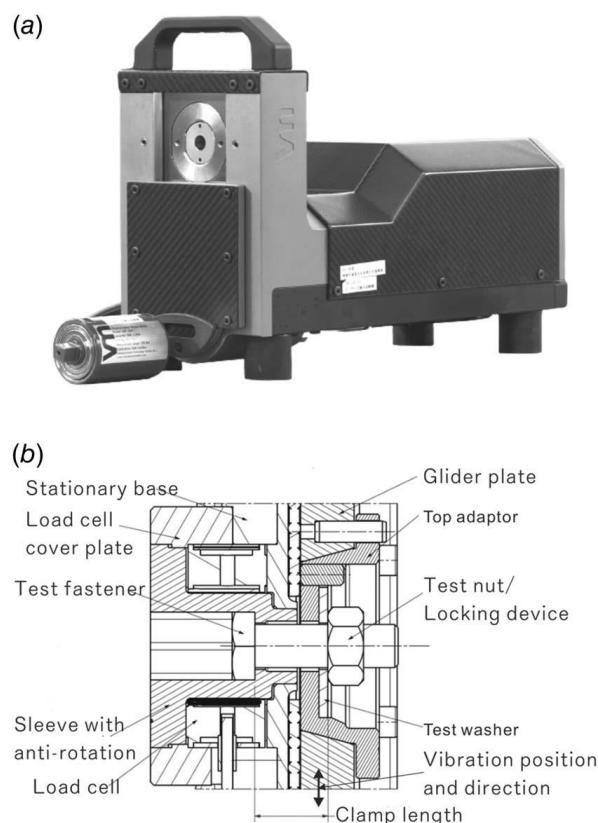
Vibration loosening test apparatus: (a) Junker fastener test bench and (b) cross-sectional schematic diagram
